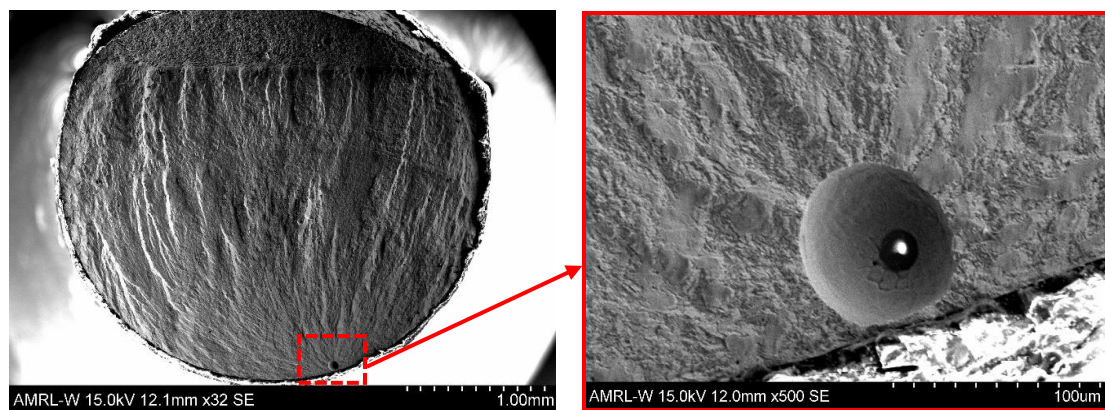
Typical welding pore found on fracture surfaces of USF testing specimens cut from weldments.
